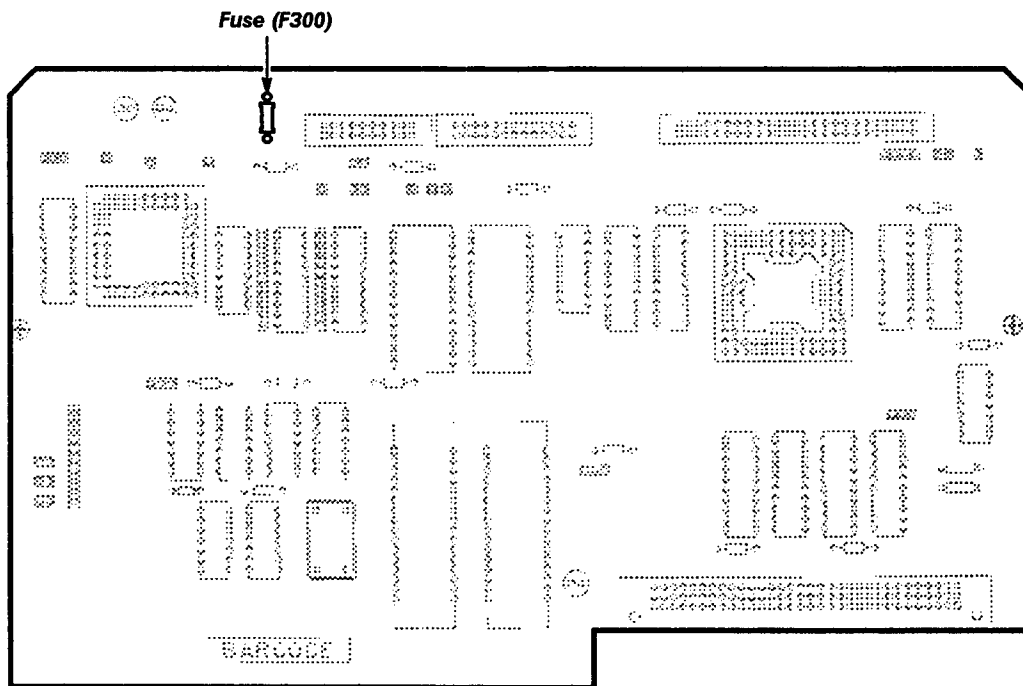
A16 Display Controller Board Fuse Locator Diagram
